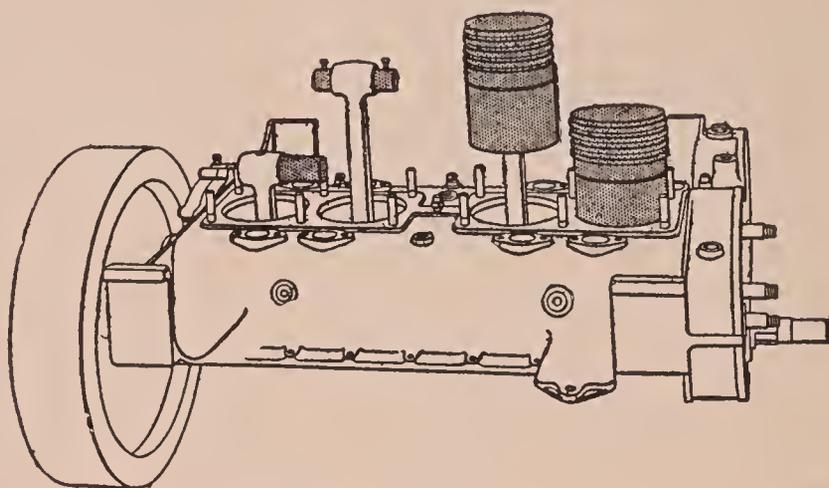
Beginning to take off the pistons, showing the piston pins at the left without locking screws.
